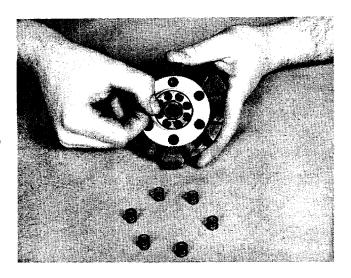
Inserting Discharge Valve Cushion Retainer.
